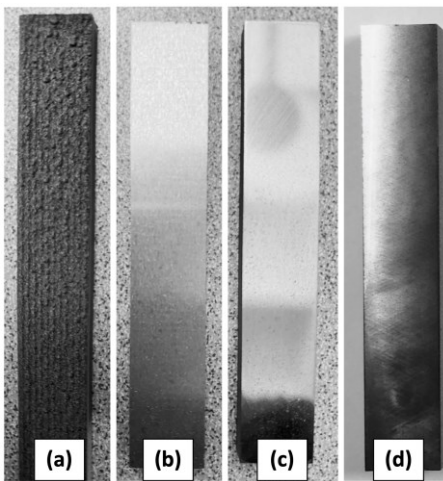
Photograph of bending samples at various stages of preparation: (a) as-deposited coating, (b) machining shown in Fig. 13(b), (c) final product after grinding, and (d) sample extracted from coated cylinder bores.
